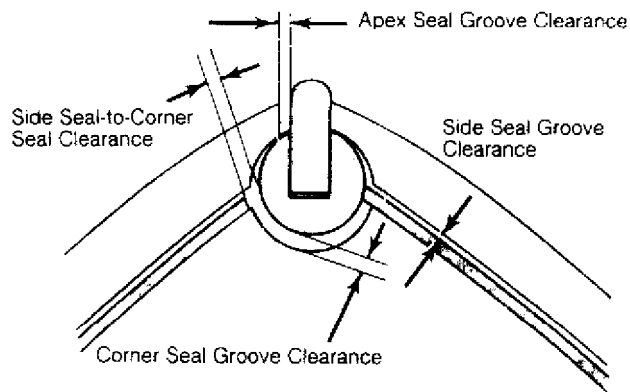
Measuring Apex, Side & Corner Seal Clearance
